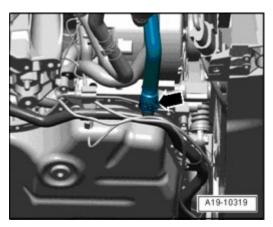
Removing Coolant Hose From Front Lower Coolant Pipe
